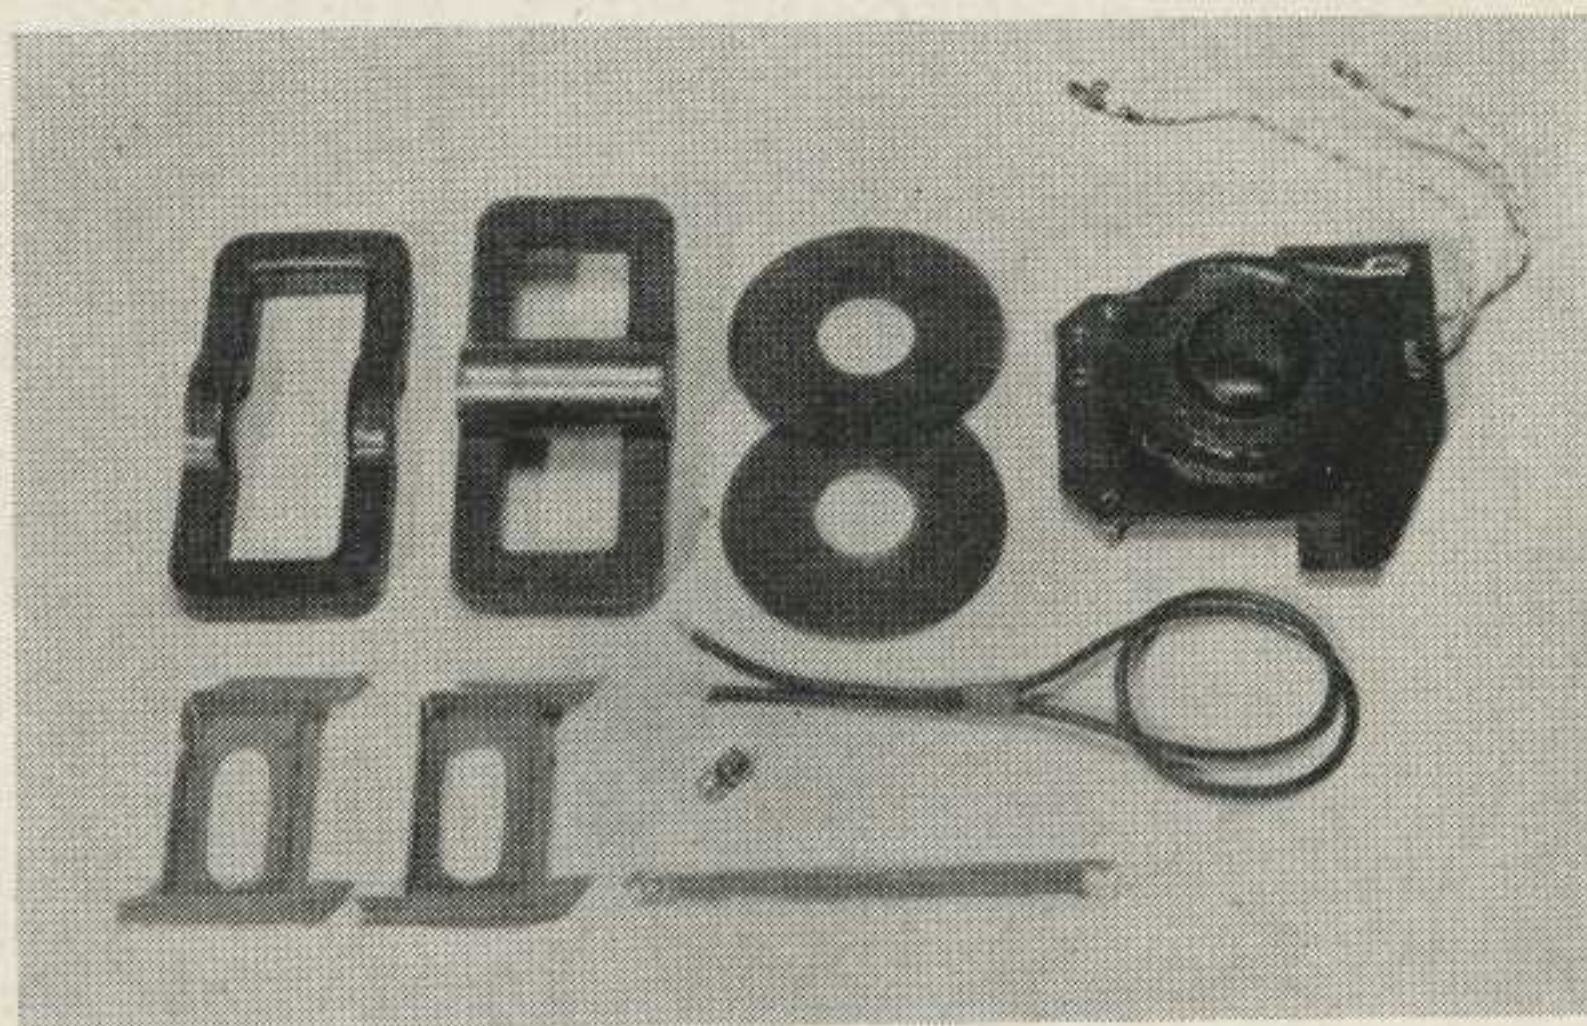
An unassembled view of a complete production-type horizontal-deflection transformer with a high-voltage winding.
